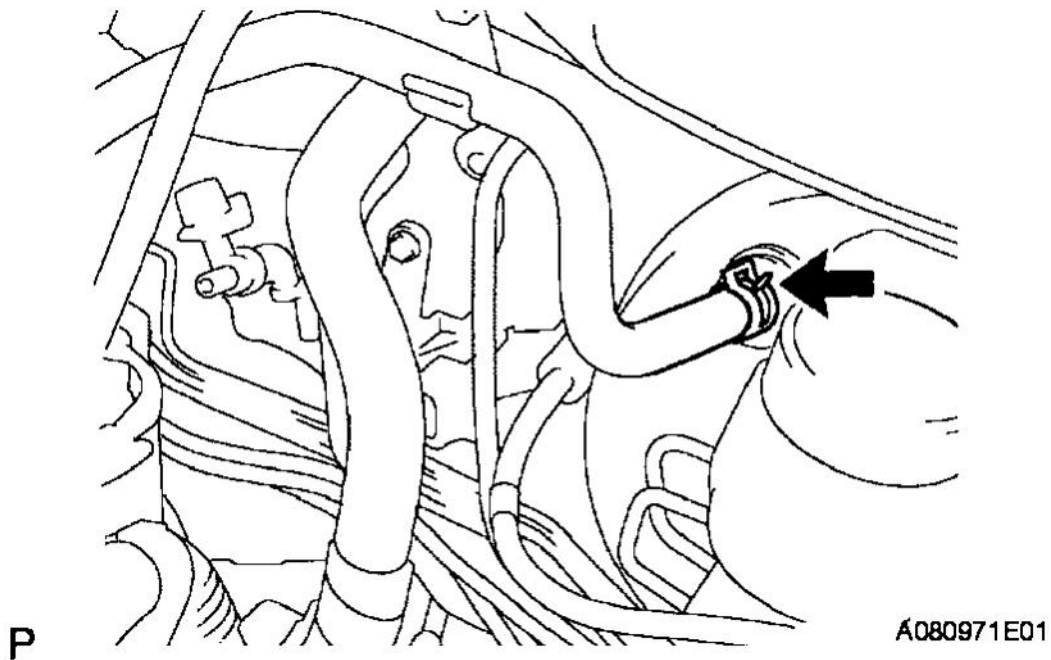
Disconnecting Radiator Hose Inlet From Union
